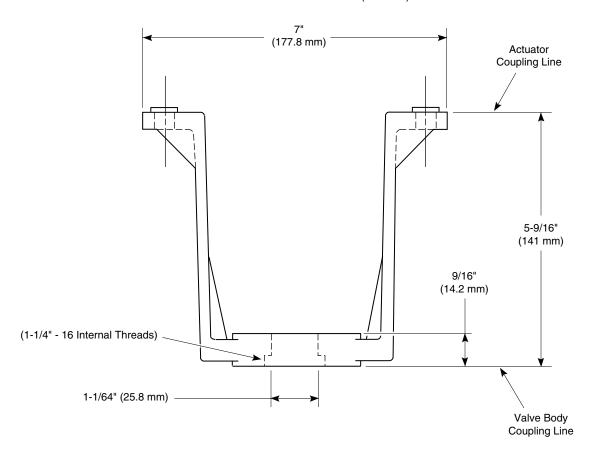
Dimensions of the Valve Linkage Mounting Bracket.
